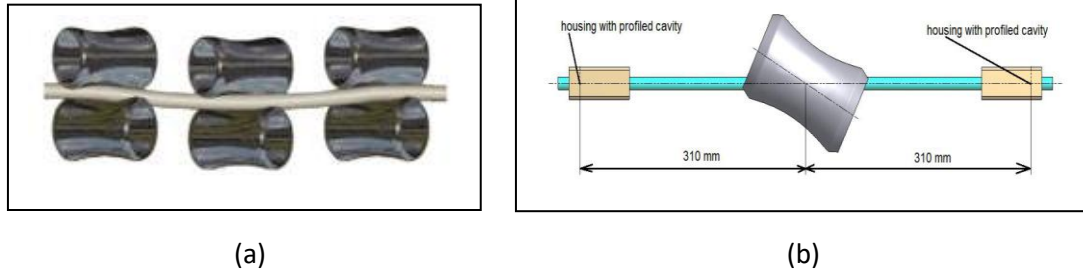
(a) Bending of a Tube Using Six-Roll Straightener with Concave Roller[46]
